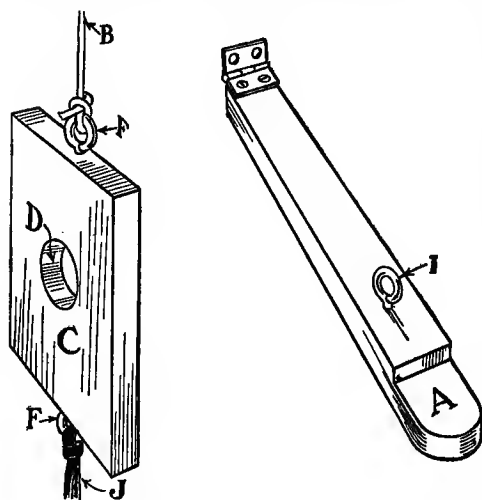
Shutter. FIG. 533. — Key Lever Stick.
